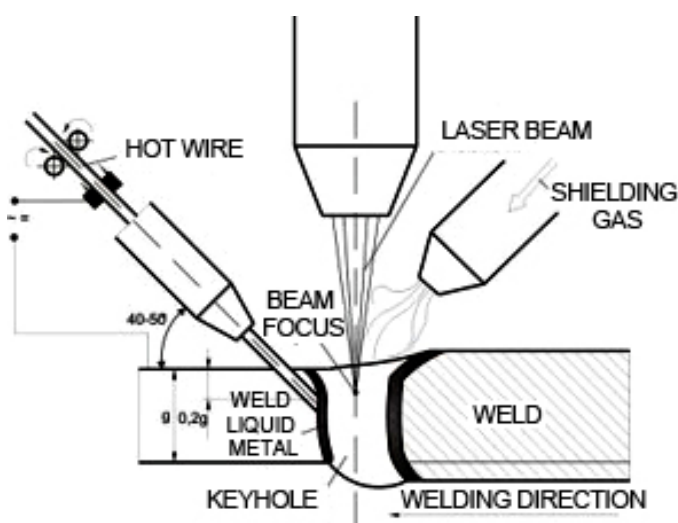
Schematic diagram of the laser welding process with hot wire fed to the keyhole area, butt joint welded in one run using the keyhole welding technique [1]
